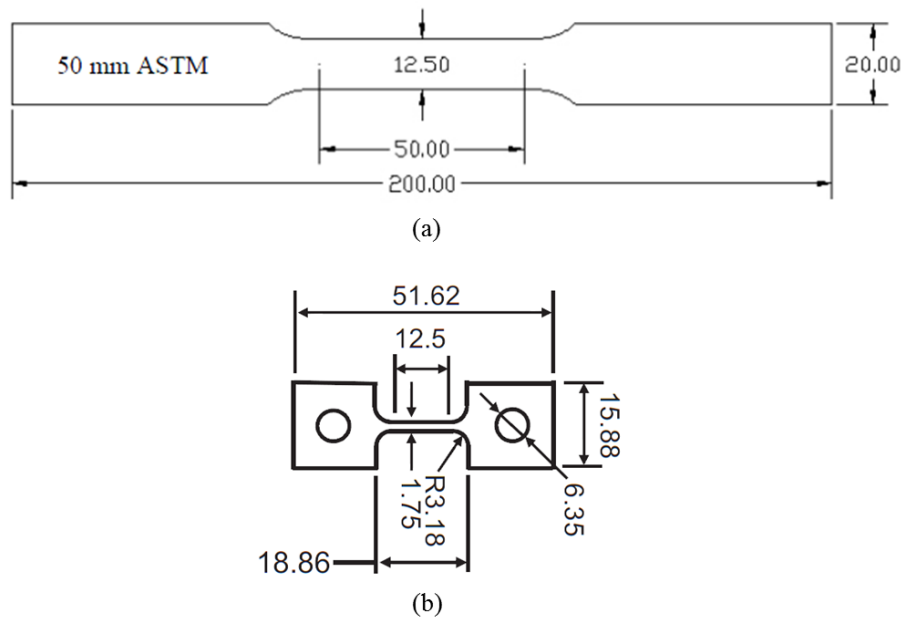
Specimen geometry of the (a) ASTM (E 8M-04) specimen and the (b) miniature specimen (dimensions are in mm)
